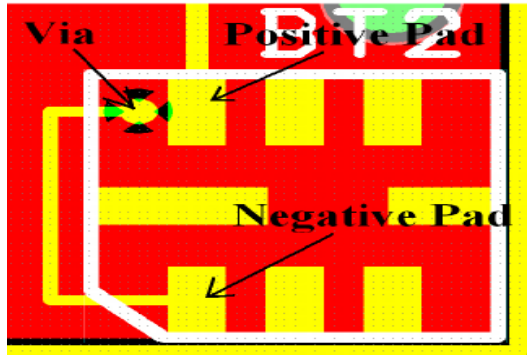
Improper PCB traces resulting in an undesirable parasitic leakage path.
